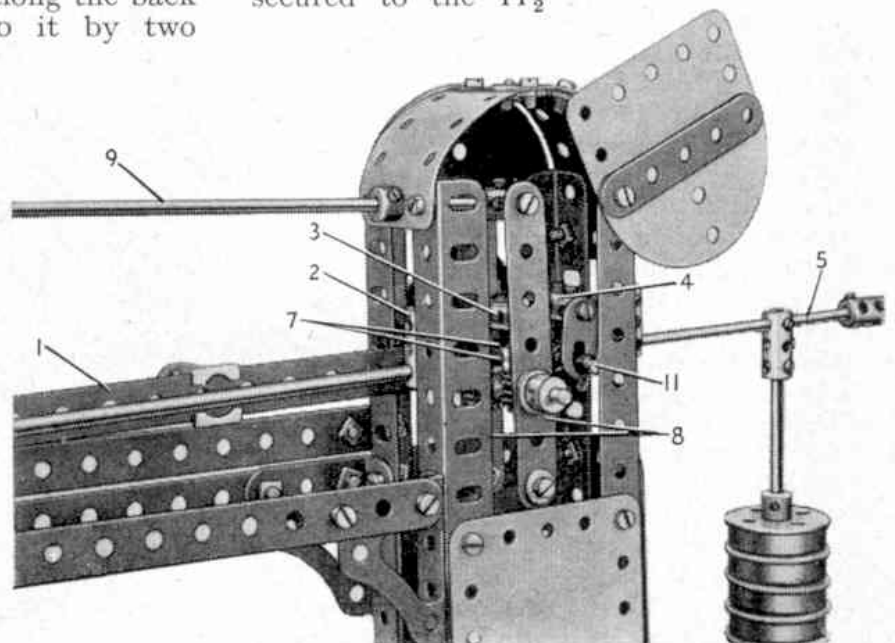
The top of the Weighing Machine column with the cover plates removed.
